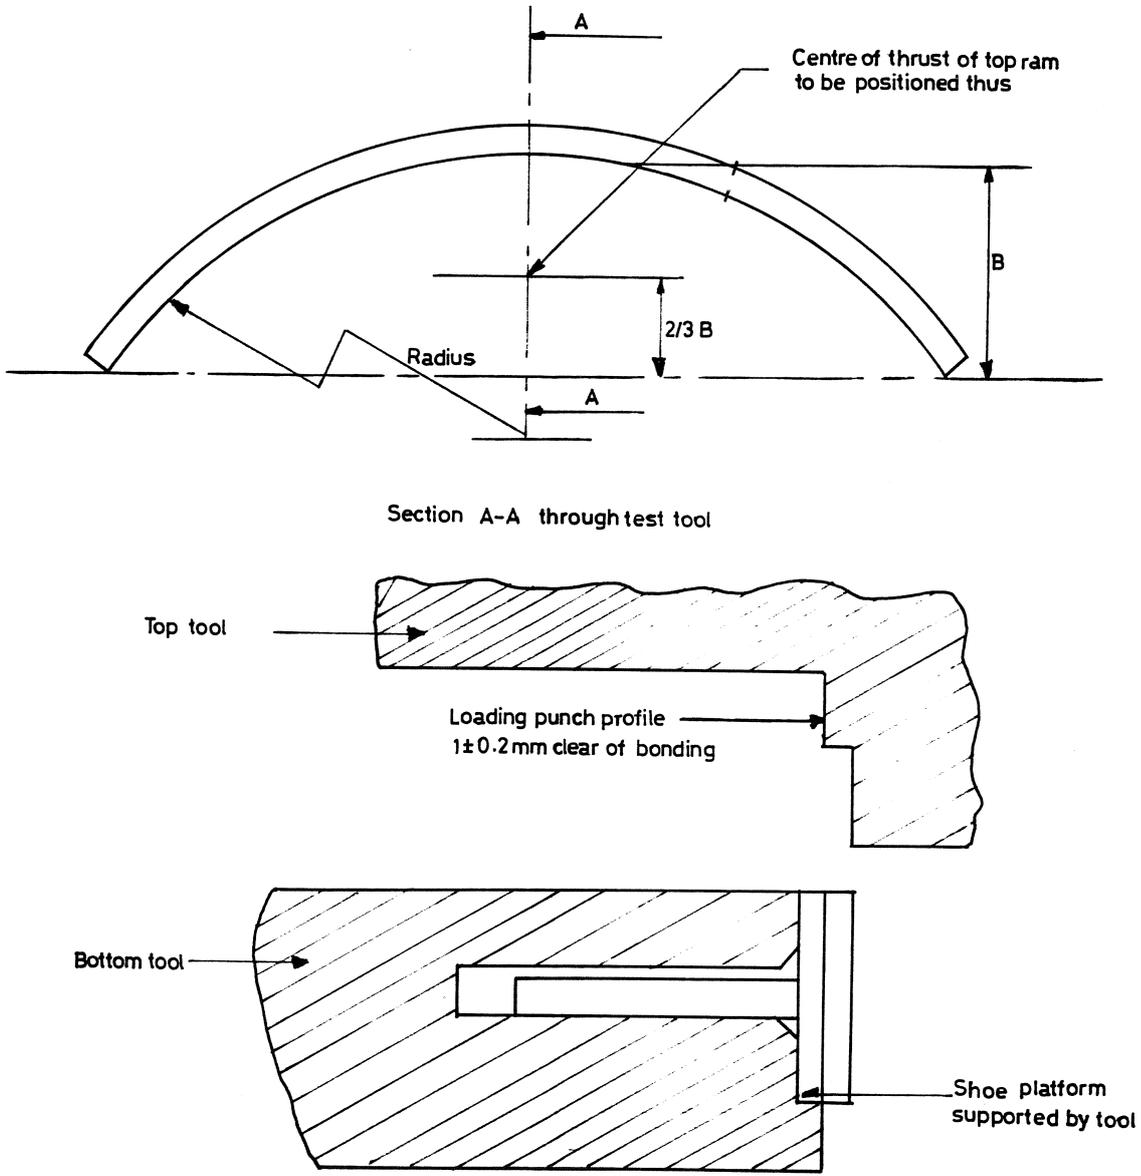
PRINCIPLES OF TEST FIXTURE – DRUM BRAKE SHOES
